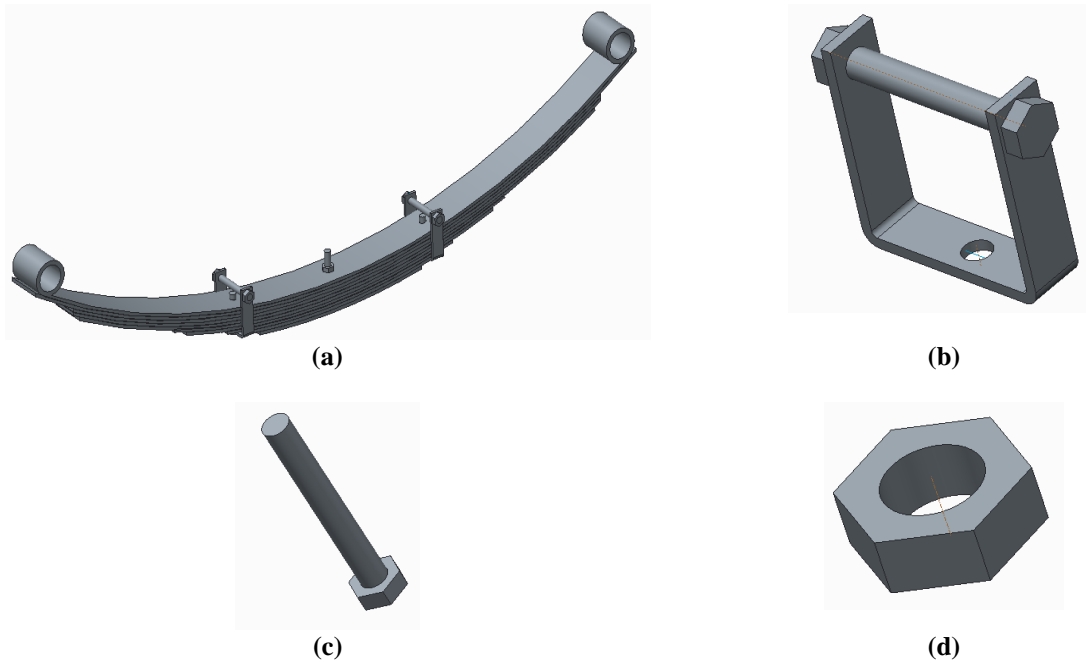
a. Assembly of Lead Spring, b. U-Clip, c. Bolt, d. Nut
